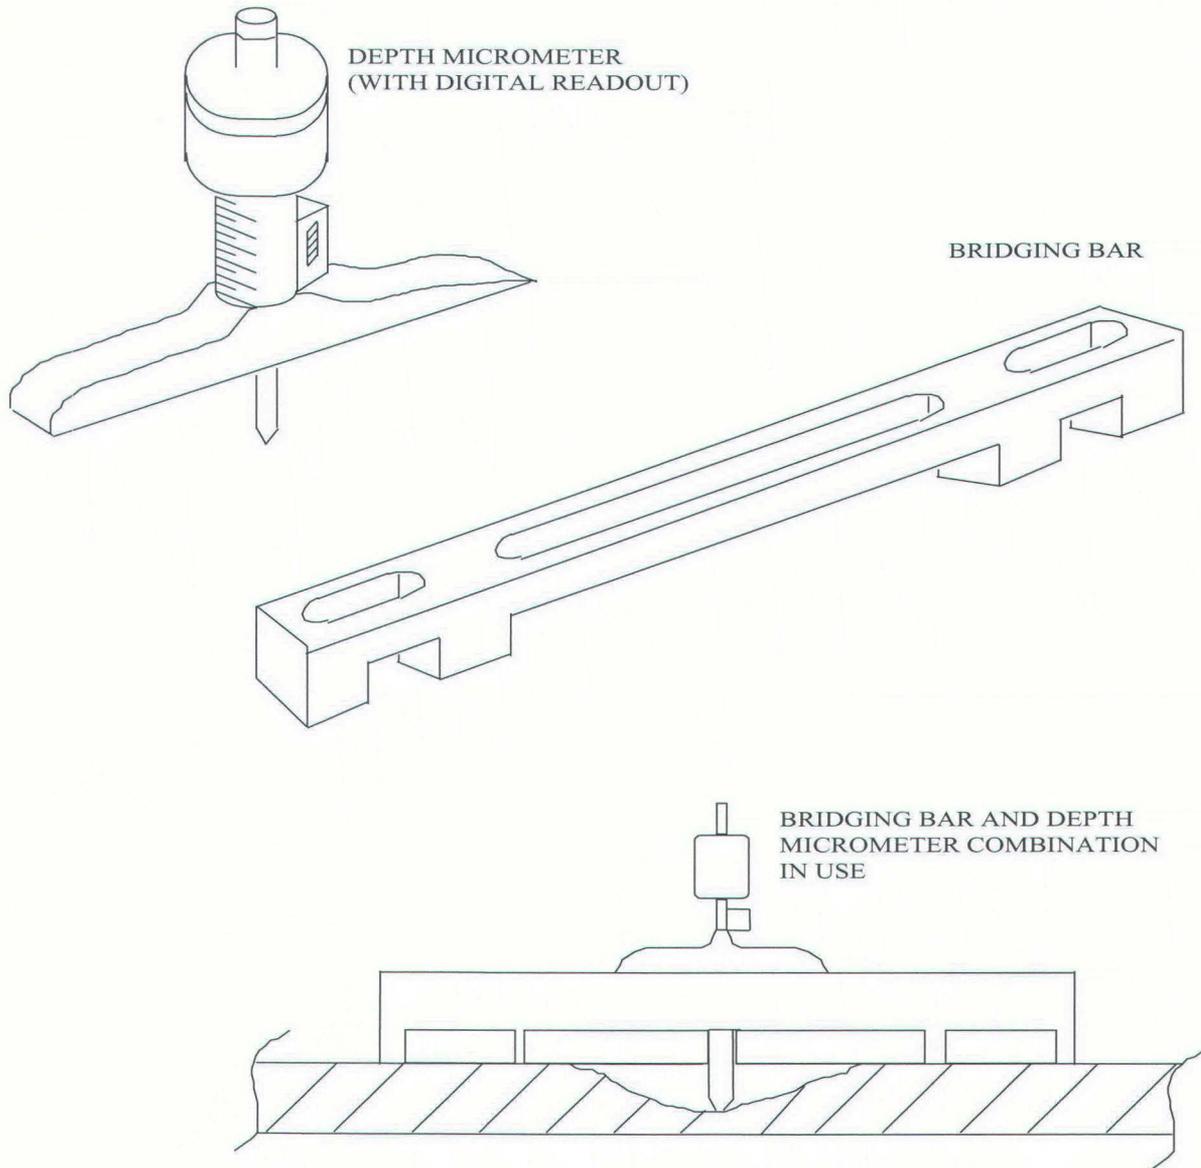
Typical Micrometer and Bridging Bar Arrangement
